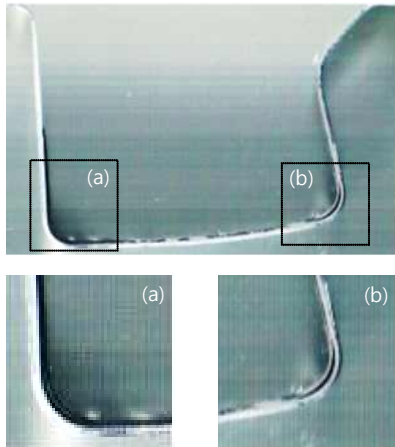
Non-adhesion defects in the bent corner of Metal-CFRP hybrid parts
